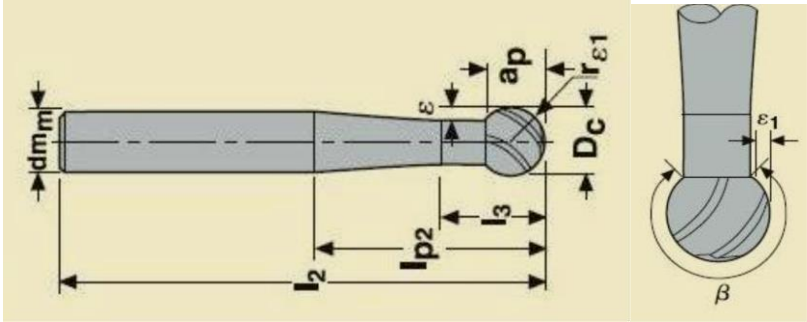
Ball milling cutter - carbide (finishing)
